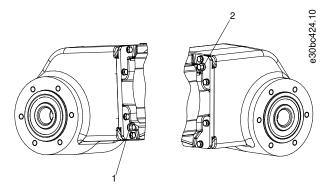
VLT® OneGearDrive® Oil Screws 1 and 2
